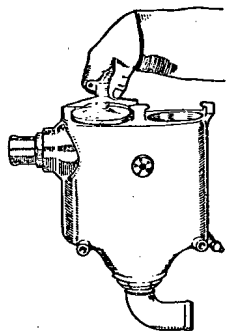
FINE FUEL FILTER (REMOVING COVER WITH FILTERING ASSEMBLY)
